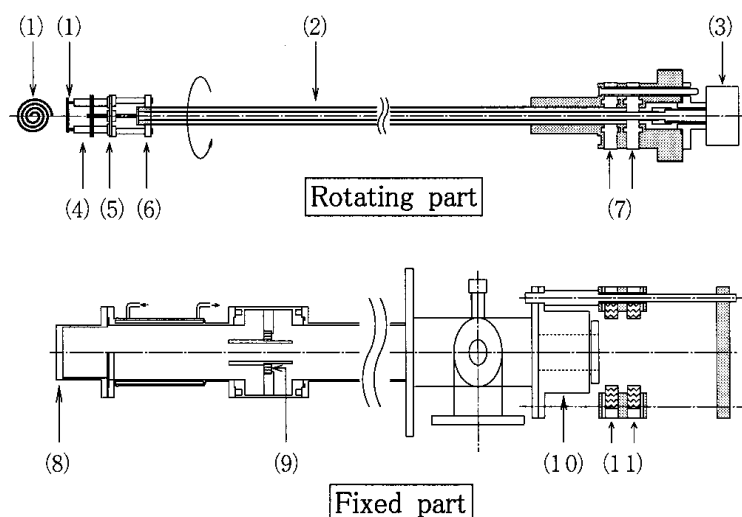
Fixed part and rotating part of the improved Q-machine source [16]
